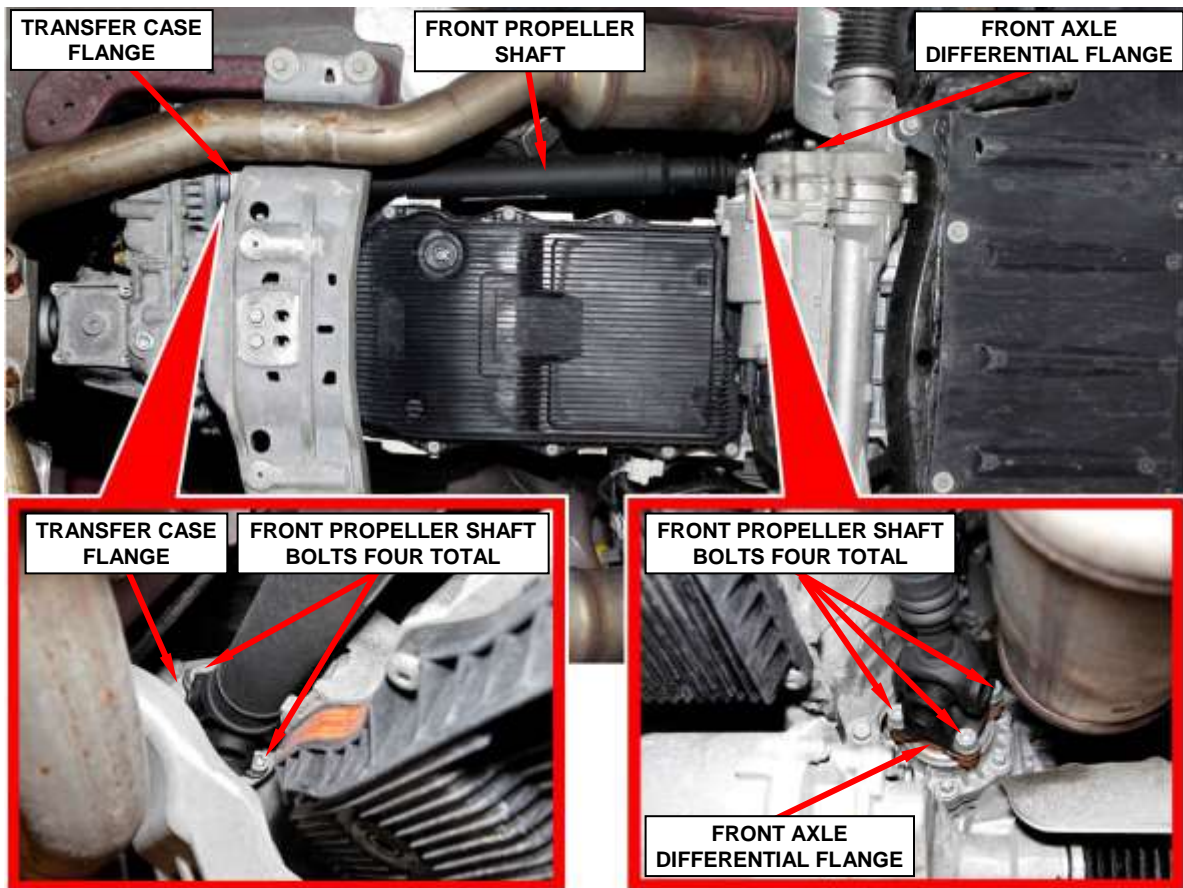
Front Propeller Shaft Bolts at Front Axle Differential and Transfer Case
